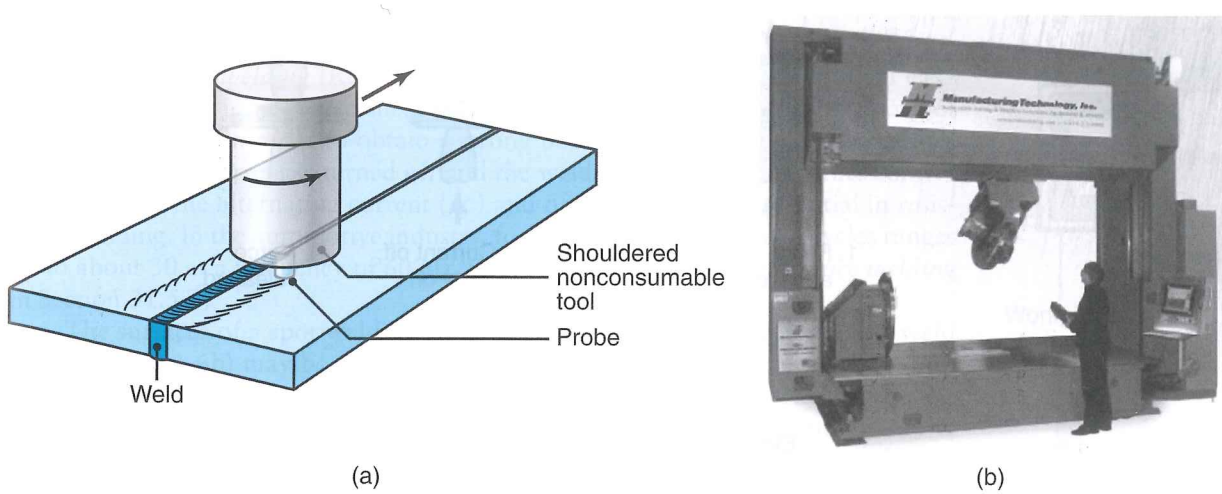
The friction-stir-welding process. (a) Schematic illustration of friction stir welding; aluminum-alloy plates up to 75 mm thick have been welded by this process. (b) Multi-axis friction stir welding machine for large workpieces, such as aircraft wing and fuselage structures, that can develop 67 kN axial forces, is powered by a 15 kW spindle motor, and can achieve welding speeds up to 1.8 m/s. *Source:* (b) Courtesy of Manufacturing Technology, Inc.
